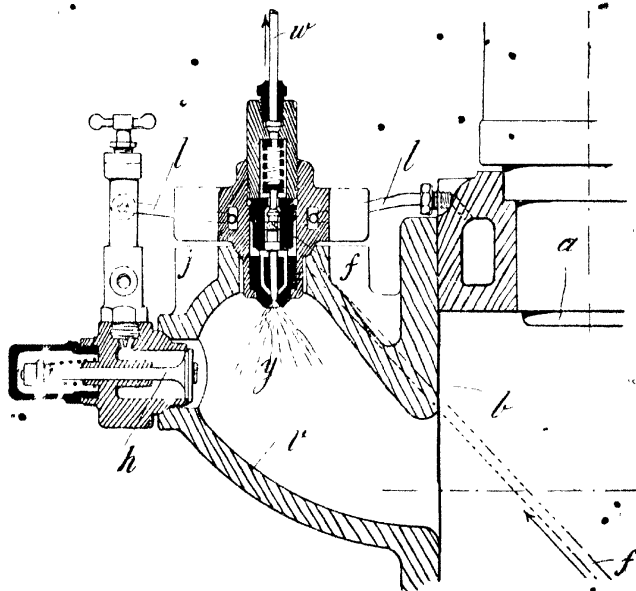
Sectional elevation of vaporiser used on the Ruston residual-oil engine, showing details of the mechanical atomiser.
